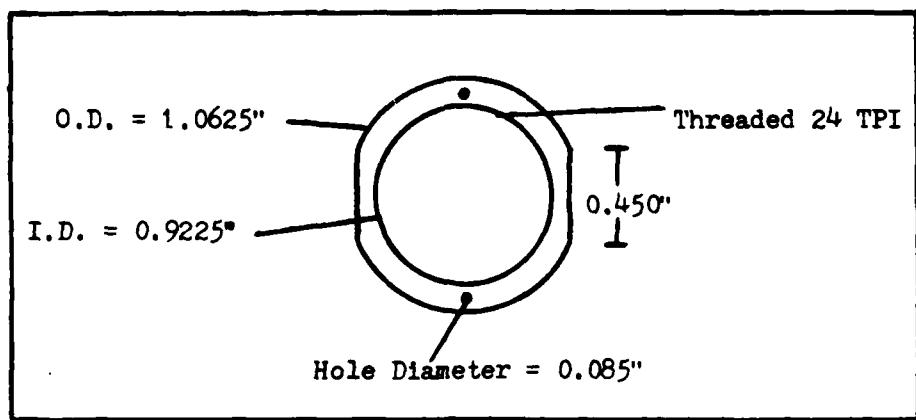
Brain Chip Package Outer Cylinder Nut (Mount)
